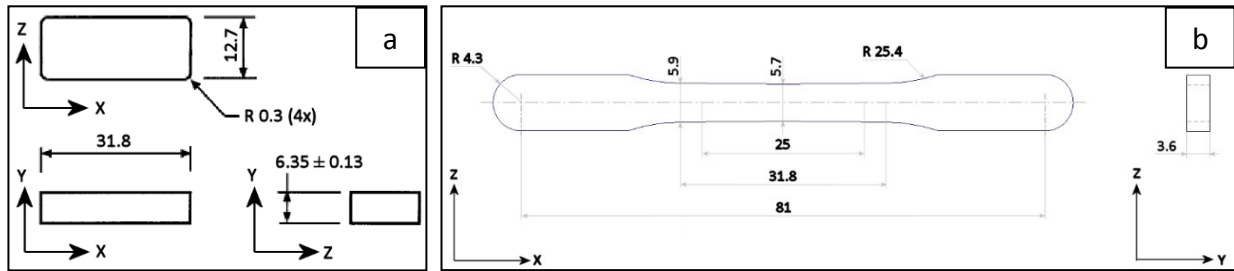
Geometry of samples produced for mechanical tests: a) flexural (FLEX), b) tensile (TENS_0). Dimensions in mm.
